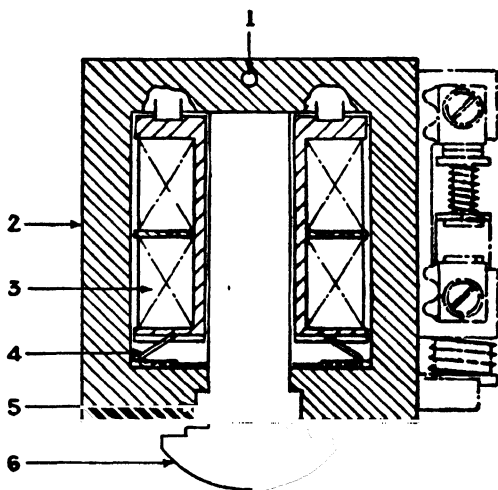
Solenoid with Cutout Switch, Type CR-9503-209-C
